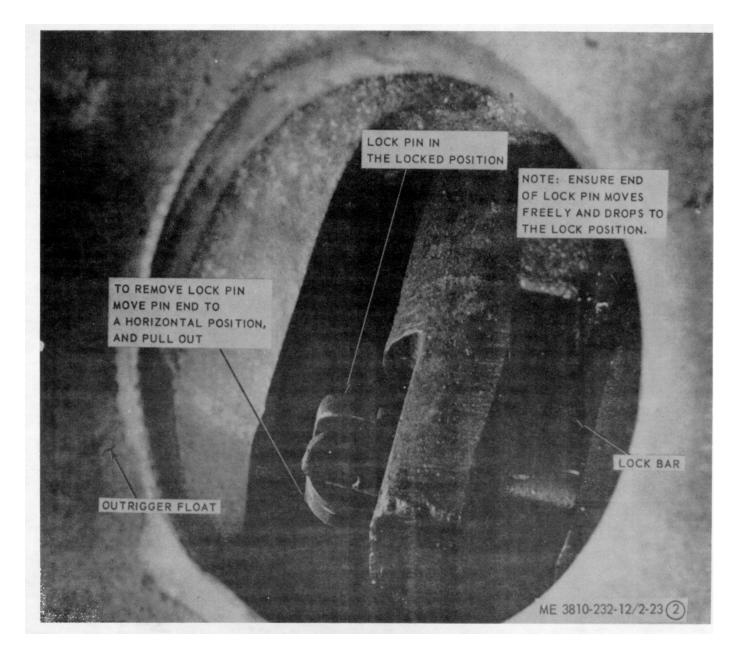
Stowed outrigger floats, removal and installation (model 2380) Sheet 2 of 2.
